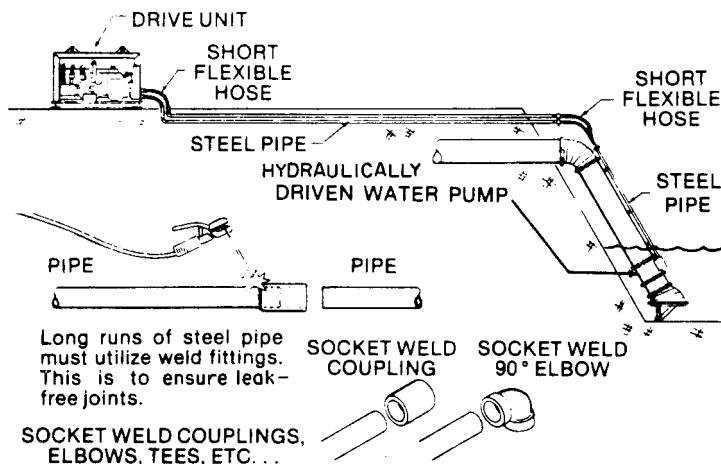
For permanent installation, steel pipes with welded joints are generally used for the hydraulic oil conduits instead of hoses.
